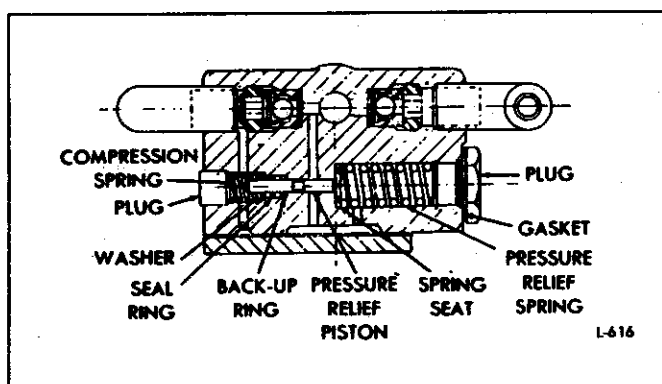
Engine-Driven Hydrostarter Charging Pump Pressure Relief Piston Assembly
